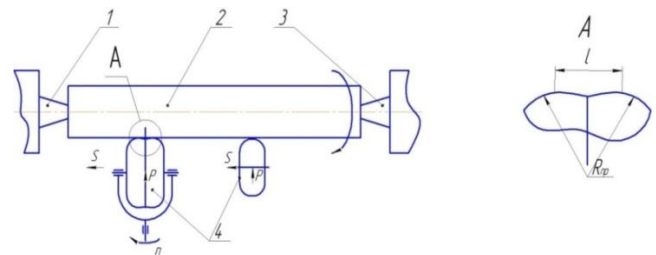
Schemes of hardening treatment with two radial (I) and one radial roller (II) on a lathe (a) and a view of the working part with two radial rollers (b):
